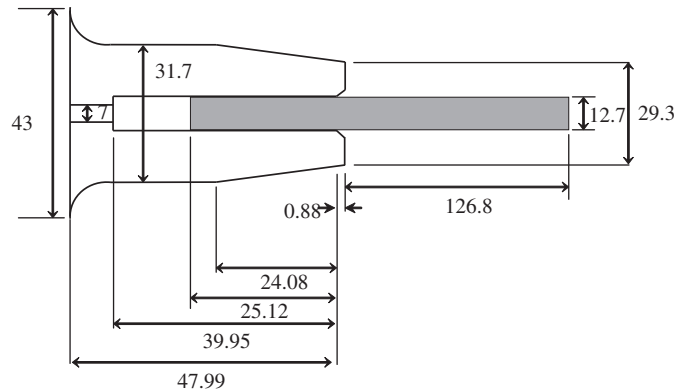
Holder and blank dimensions for 127.68 mm overhang length (all dimensions are in mm).
